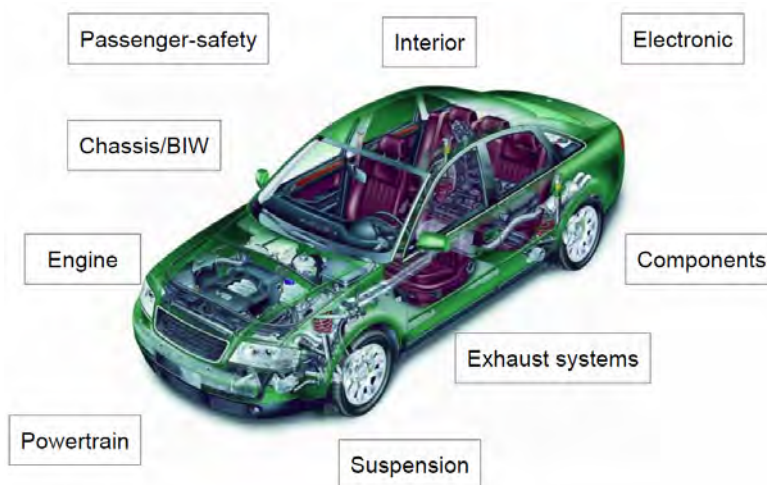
J-7: Common automotive applications using laser welding^{T-9}
